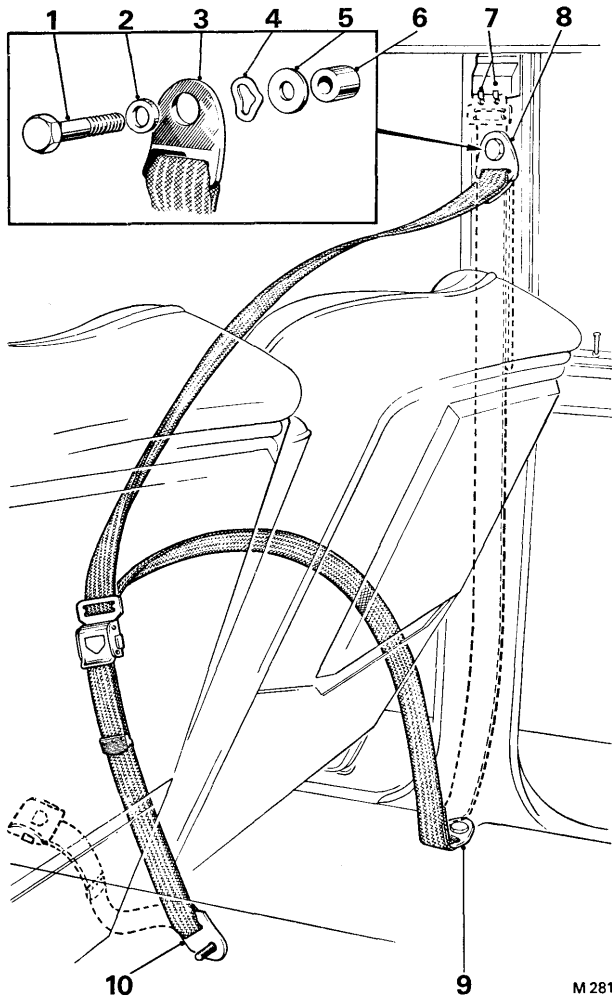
FRONT SEAT STATIC BELT MOUNTINGS (Britax early type belt with 'Lyfe-Lok' buckle)
